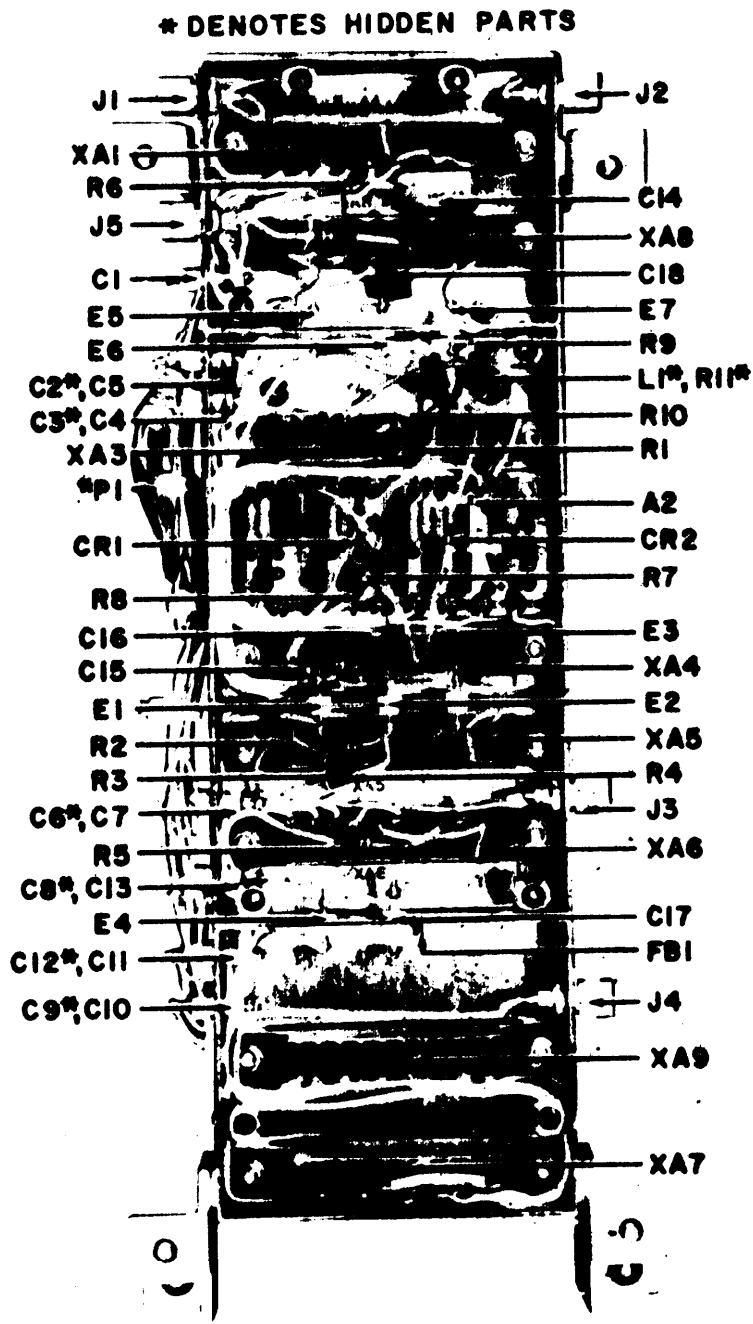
Type 791800-1 IF Demodulator Assembly (A4), Bottom View , Location of Components
